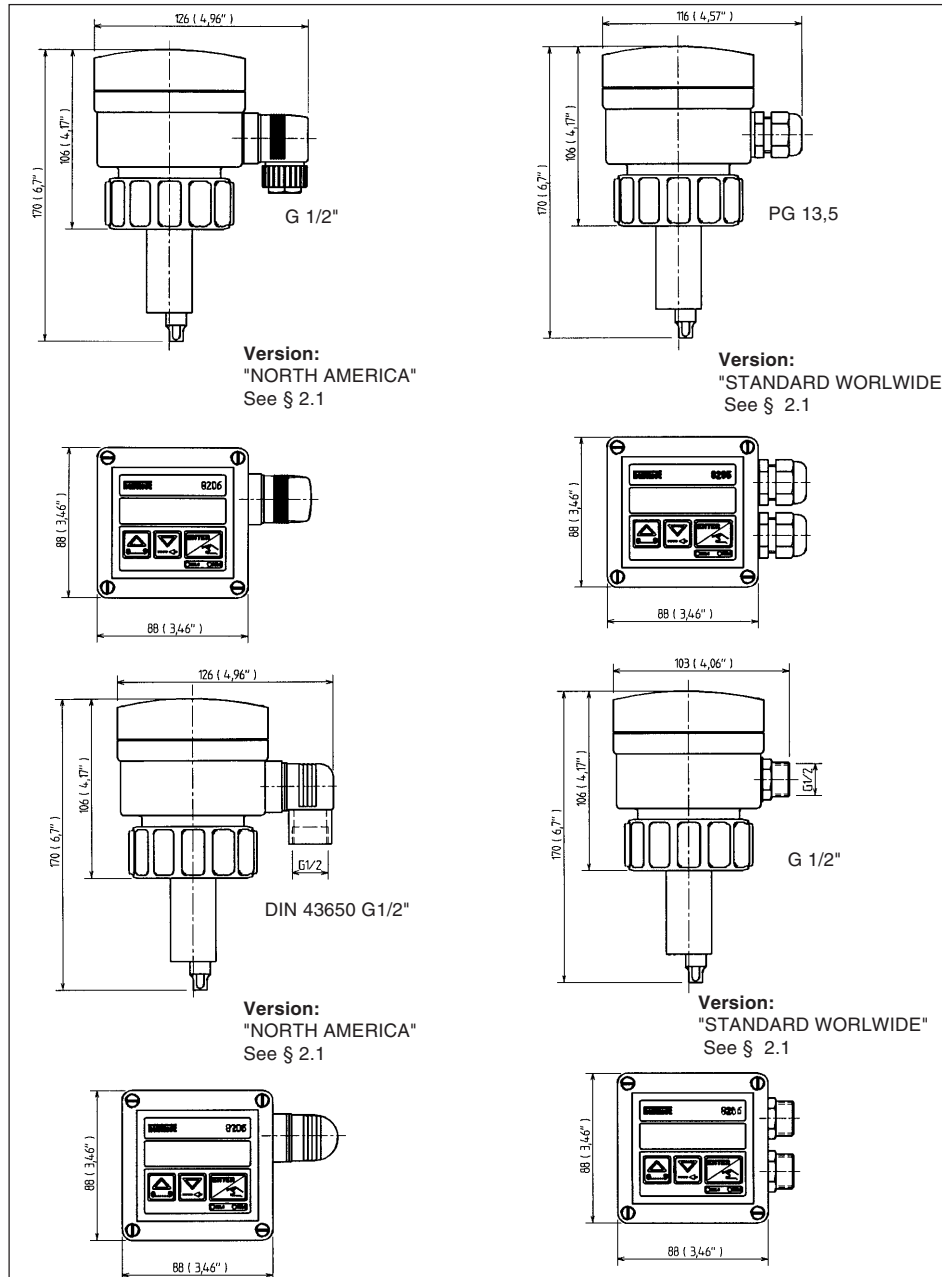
Dimensions redox transmitter type 8206 compact housing
